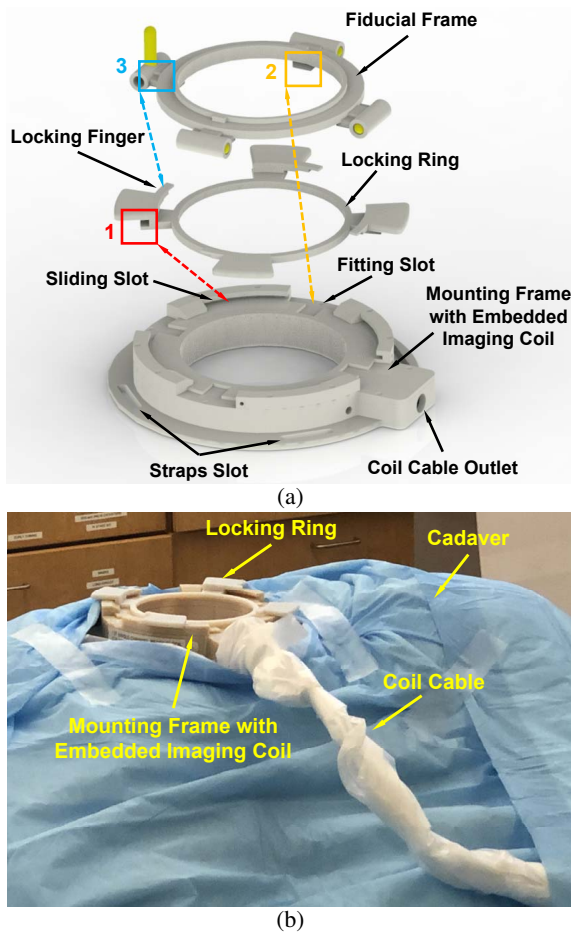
Improved design of the mounting frame with embedded imaging coil. (a) Exploded CAD model of the mounting frame, showing the mating of components. The color numbers demonstrate the order to assemble the mounting frame. (b) Assembly of the mounting frame attached to the cadaver as presented in Sec. IV.
